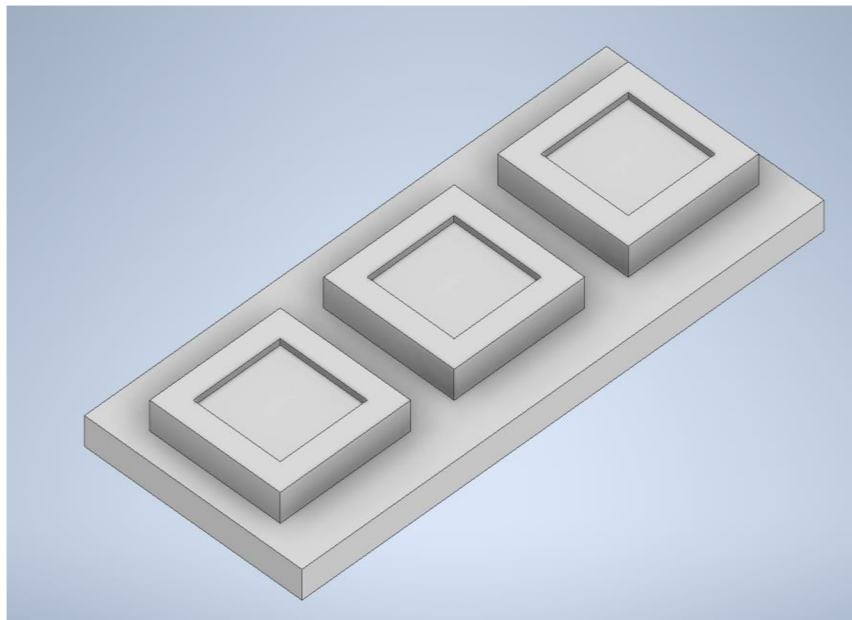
3D model of a mold used for casting the silicone samples for testing purposes.
